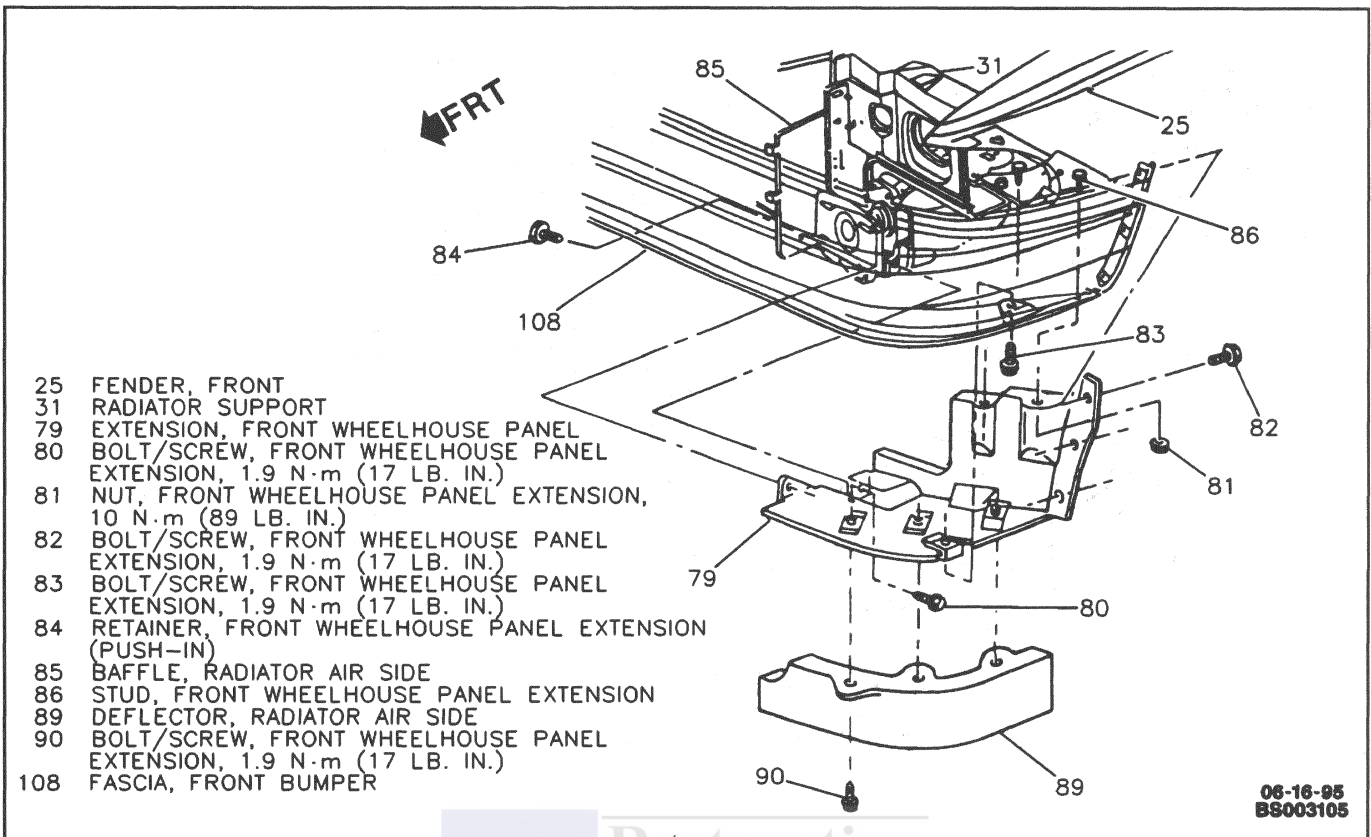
Front Wheelhouse Panel Extension and Radiator Air Side Deflector
